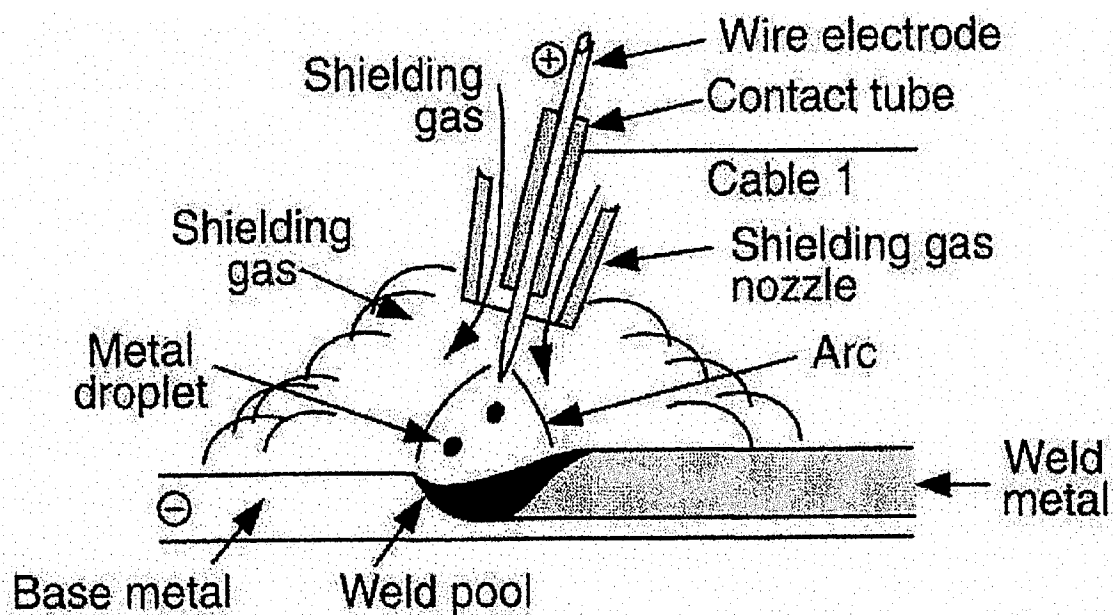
GMAW (welding area enlarged) [9]
